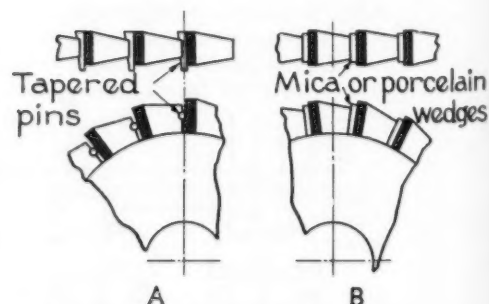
Two methods of wedging tungsten-carbide bits into slots of milling cutters preparatory to furnace brazing.
